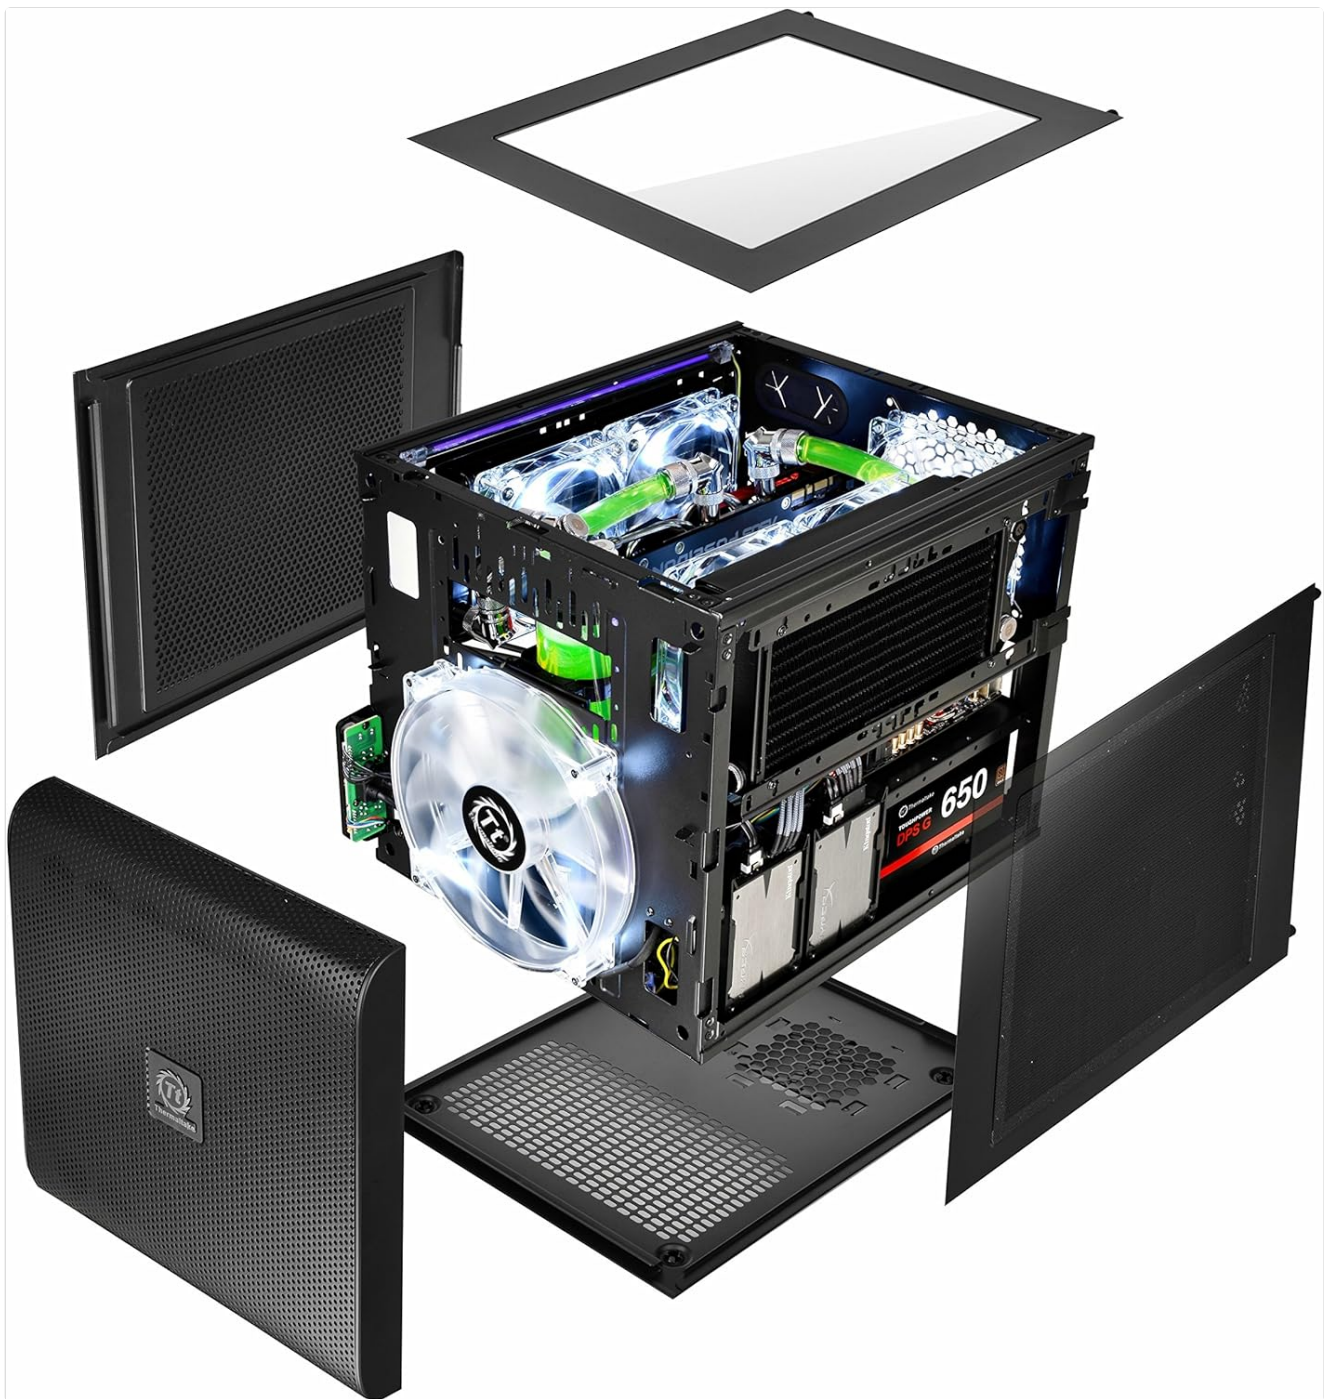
Exploded view illustrating the removable top, bottom, and side panels, and the internal structure.
